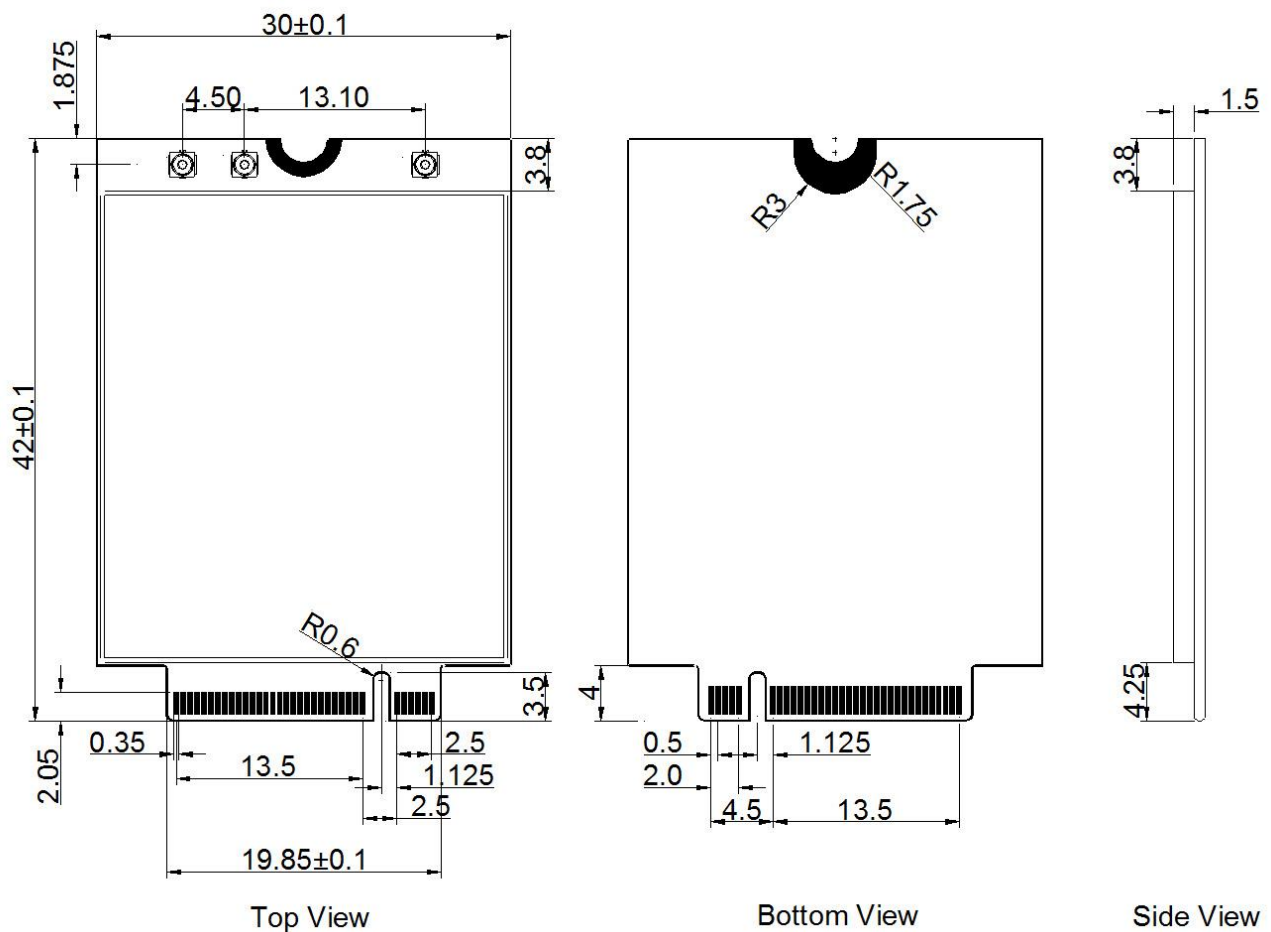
Mechanical Dimensions of EM06 (Unit: mm)
